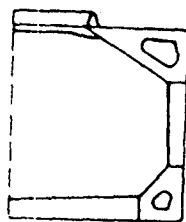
(4)② Typical midship section of OBO carrier
